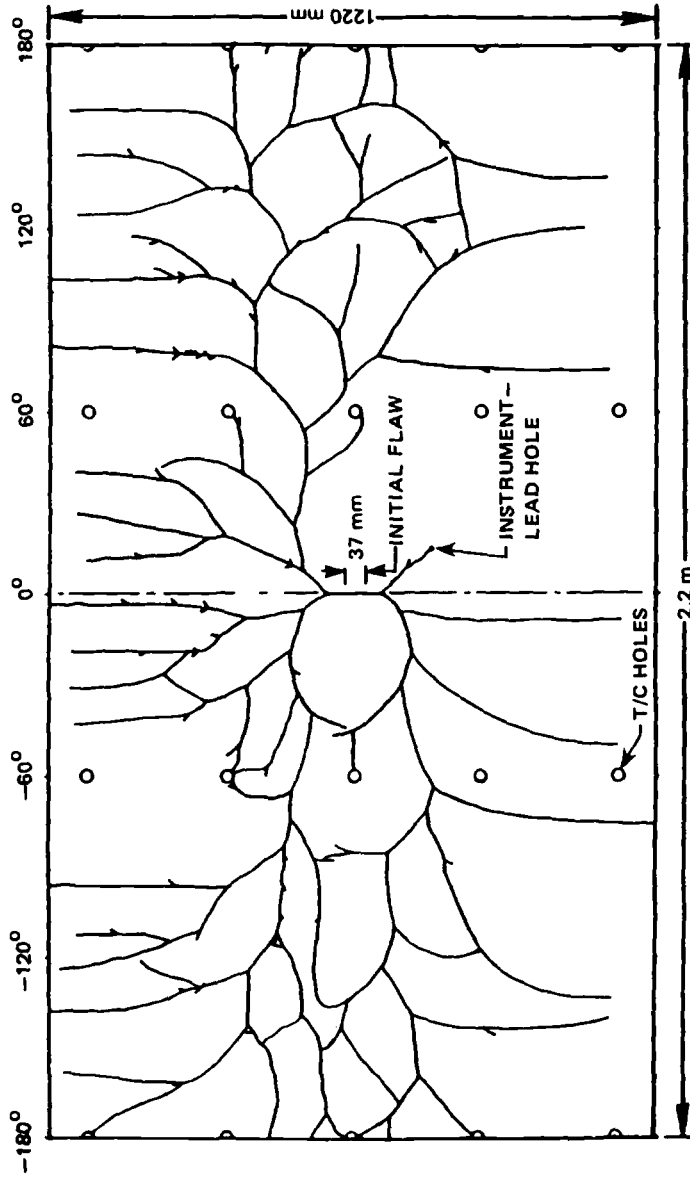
Developed view of the inner surface of the Experiment TSE-7 test cylinder showing the final crack pattern.
